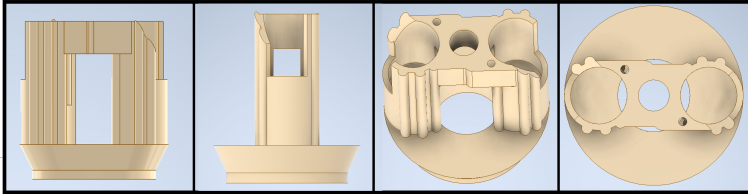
Different angle on the inner housing: Side view (left), beveled top view (center left), beveled top view (center right), top view (right).
